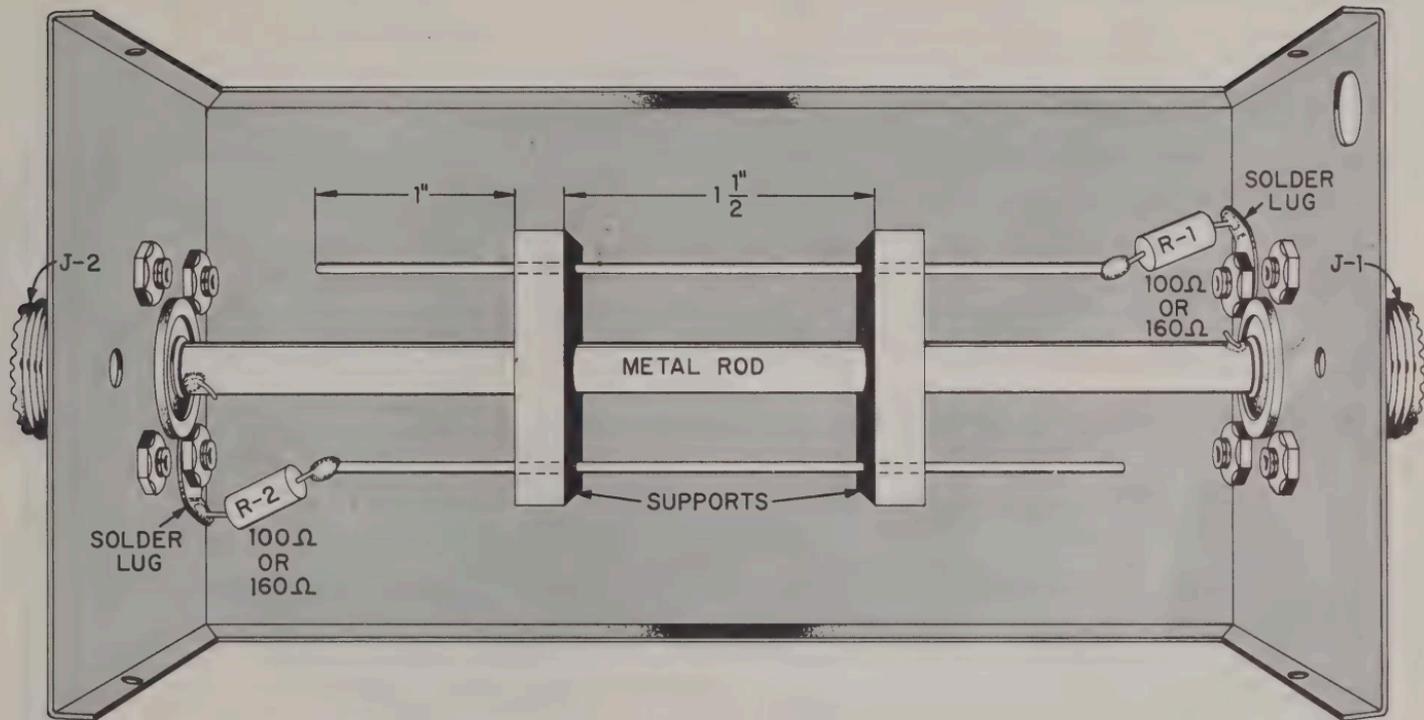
MOUNTING PARTS ON THE PICK-UP CHASSIS
